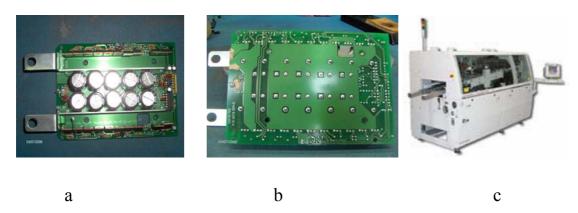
Front and back side PCB example – a and b, and a view of EconoPak® Gold machine - c
